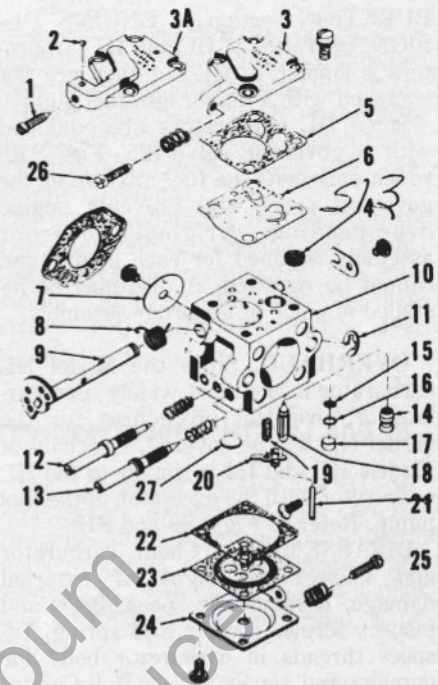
Exploded view of Tillotson Model HU carburetor. Note difference in idle speed screw location—used on fuel pump covers (3 & 3A) of some carburetors. Idle speed screw (25) may be located in cover (24).
